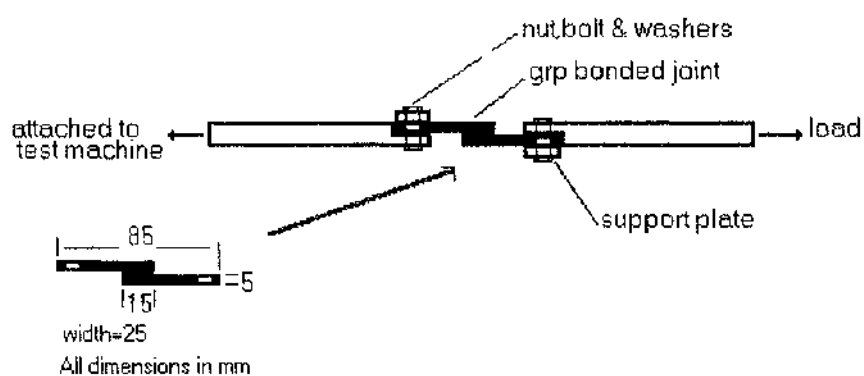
Modified grp bonded lap shear specimen and adapters for tensile testing
